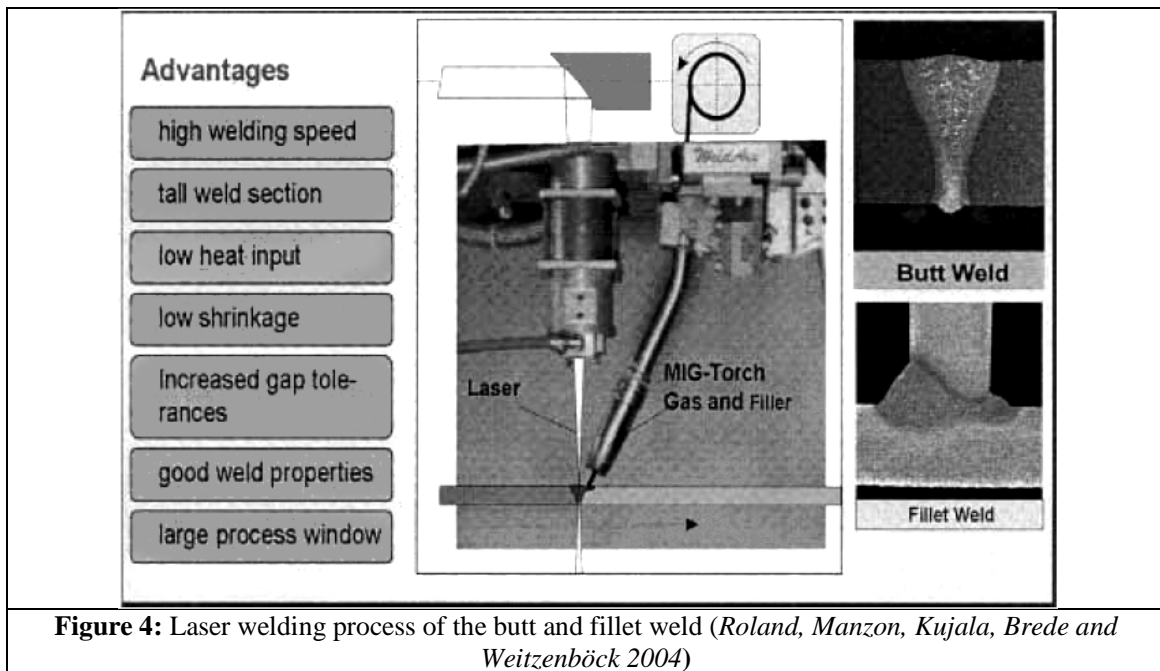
Laser welding process of the butt and fillet weld (Roland, Manzon, Kujala, Brede and Weitzenböck 2004)
